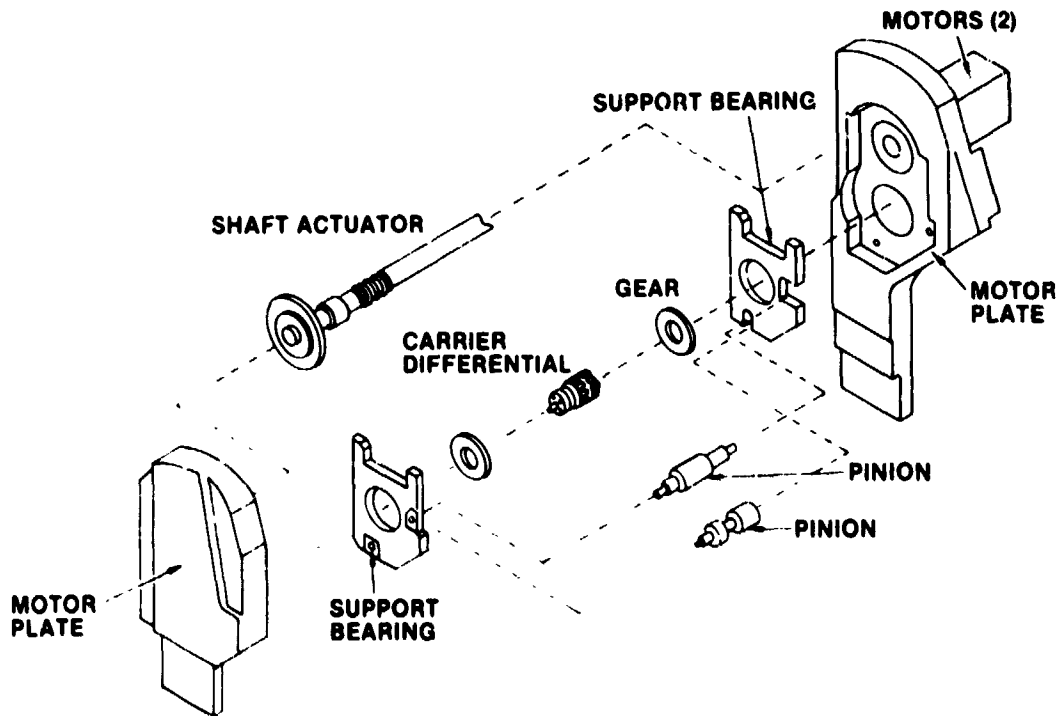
Motor Drive Assembly (Active Keel Actuator Lightweight Latch)
